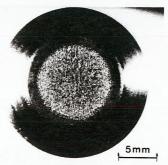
Annular fatigue crack of a pre-notched specimen.
